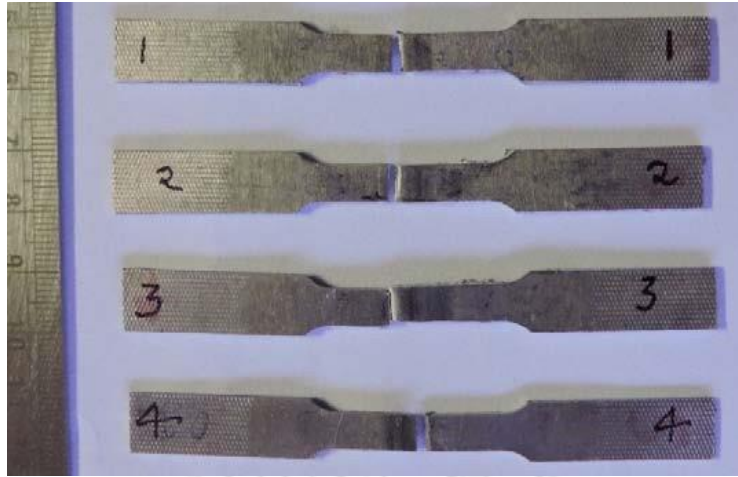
Tensile test specimens showing fracture at weld zone.
